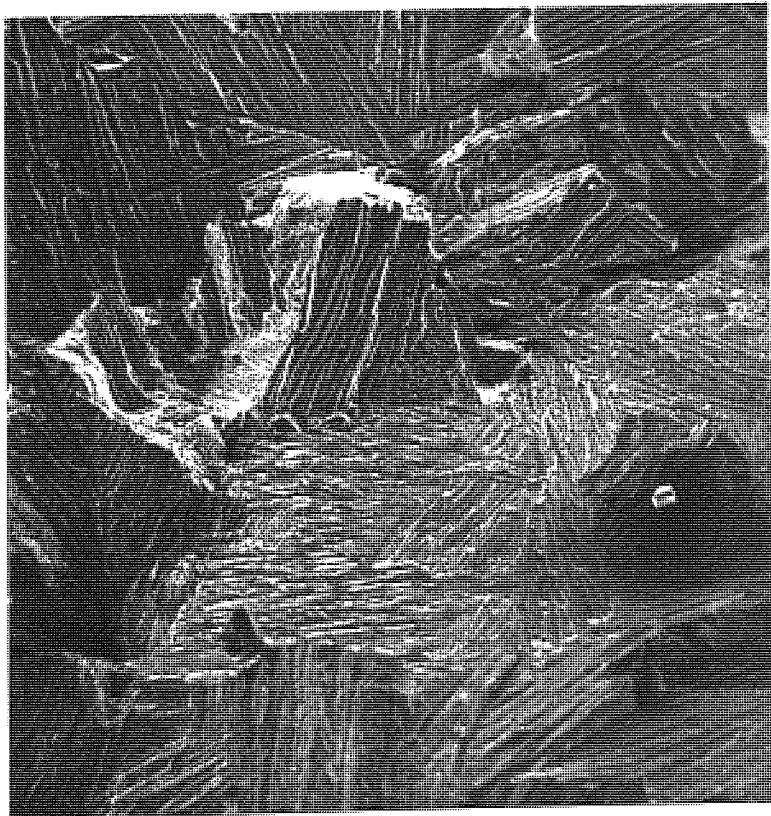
(b) FATIGUE/FRACTURE INTERFACE FROM SPECIMEN FORGED
